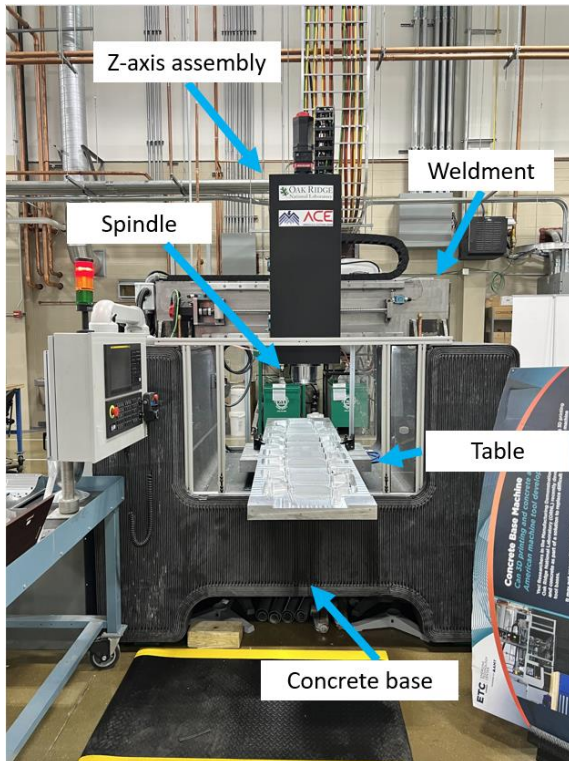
Concrete base machine tool with the cross beam weldment supporting the Z-axis and spindle assembly.
